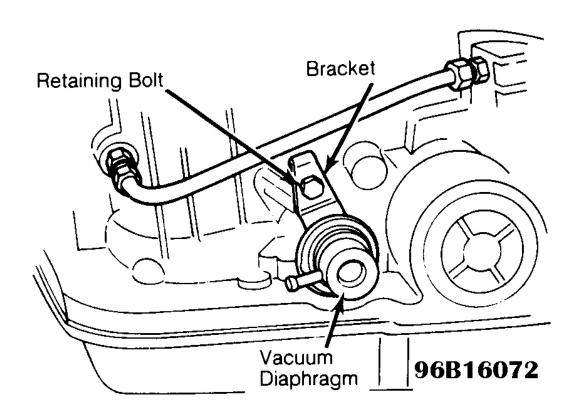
Side View of Transmission Case Courtesy of FORD MOTOR CO.
